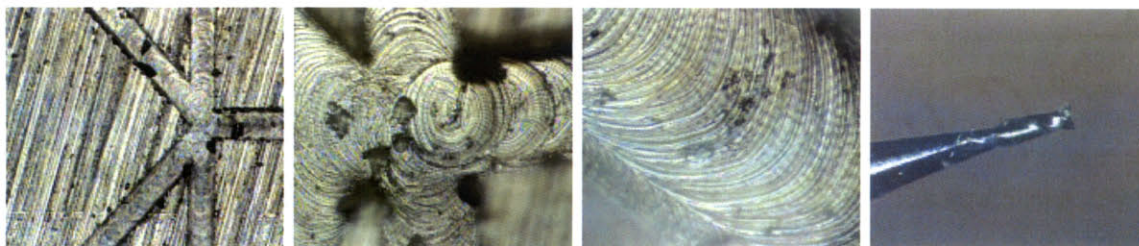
Micro-mechanical milling of precision ground aluminum blanks using a flat and round bottom two-flute end mills. Channel dimensions $\sim 500\mu m$ width, $2mm$ in height. A 20 mil flat end mill is shown after the milling operation. Processing time for milling is usually 30 minutes. A 3K table top CNC machine Modela MDX20 was used for the above operation.
